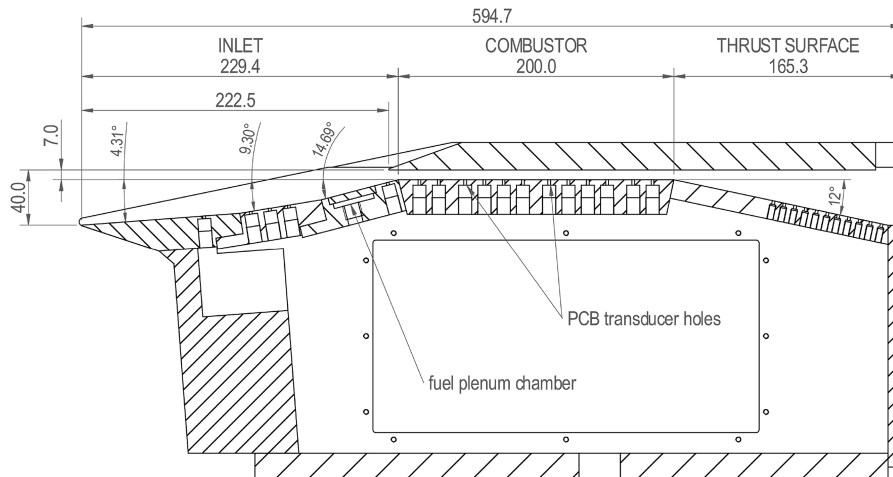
Drawing of experimental Mach 10 scramjet model tested in X2. Sectioned down the midline of the engine. Dimensions are in millimeters.
